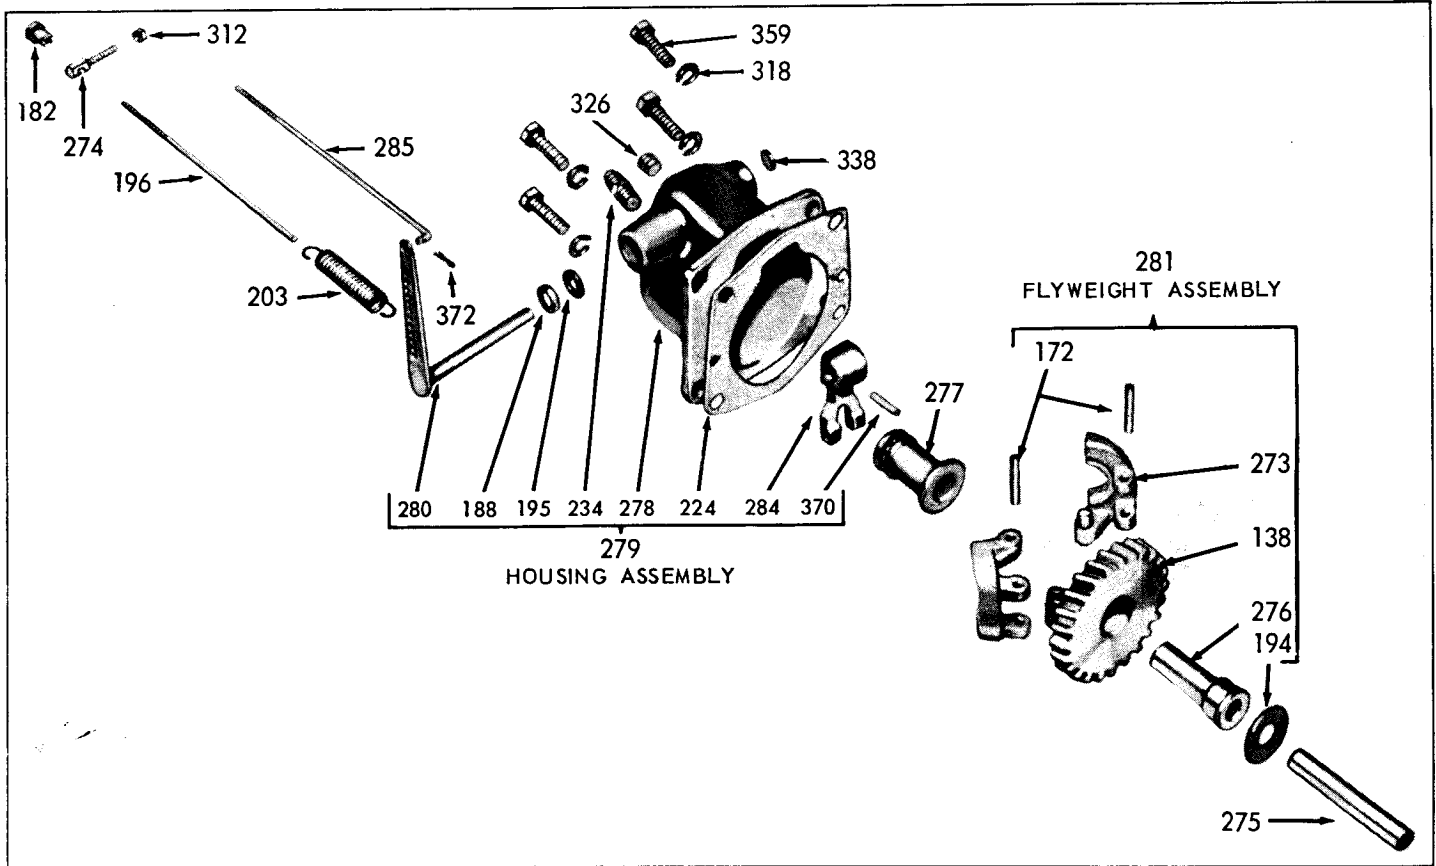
, Ref. No. 265, GOVERNOR ASSEMBLY
